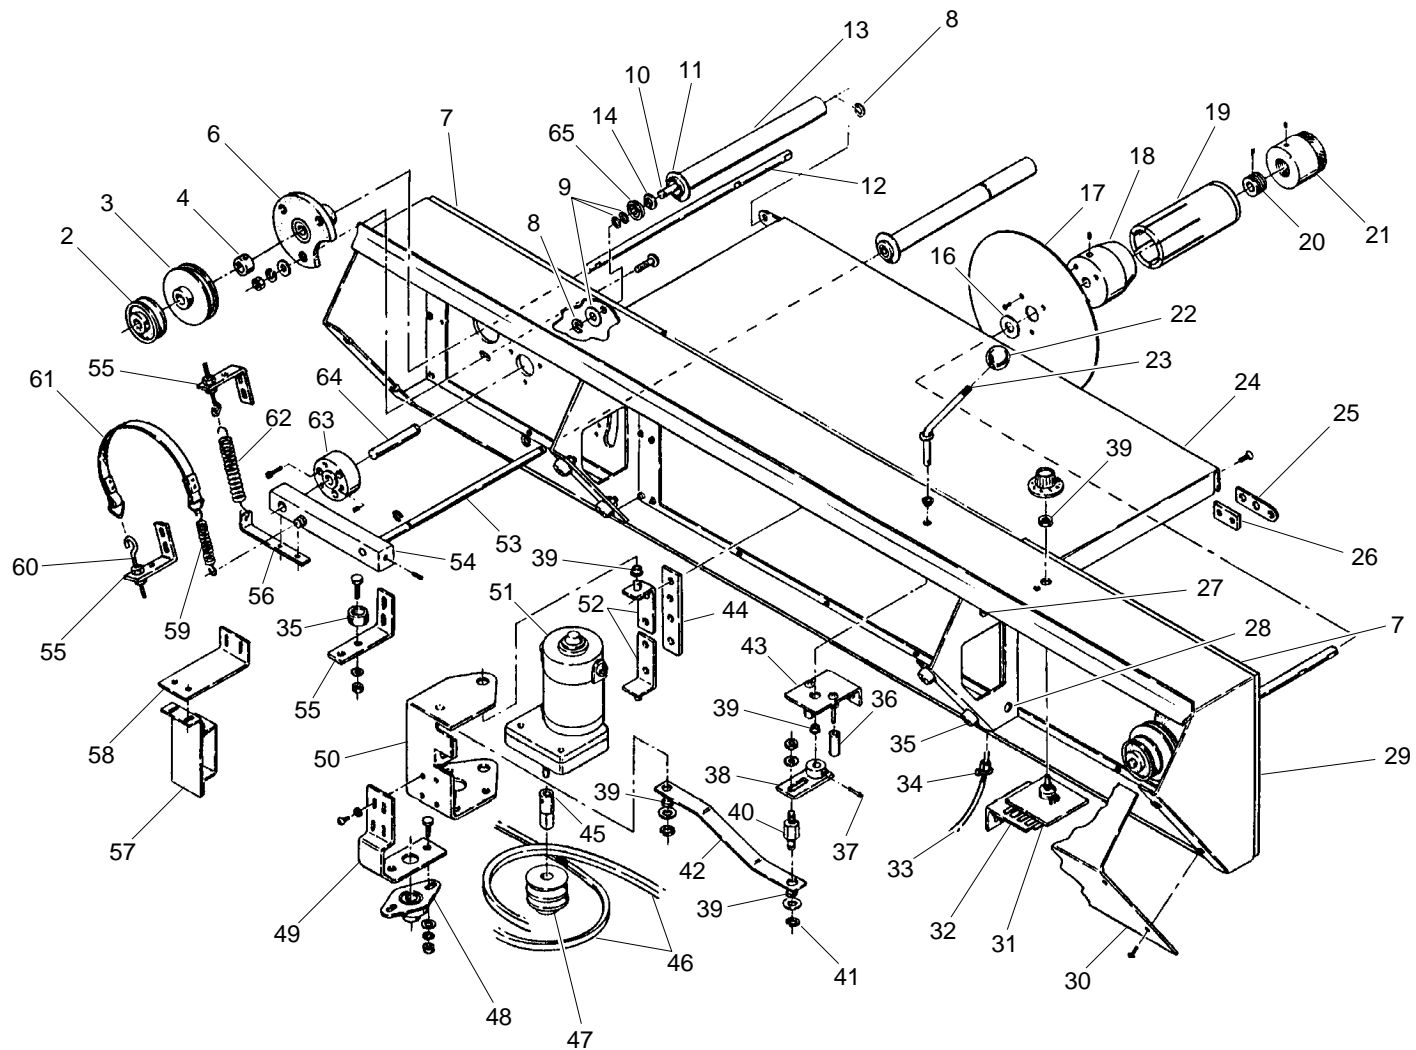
Print Inspection Station - Model QCS-2
